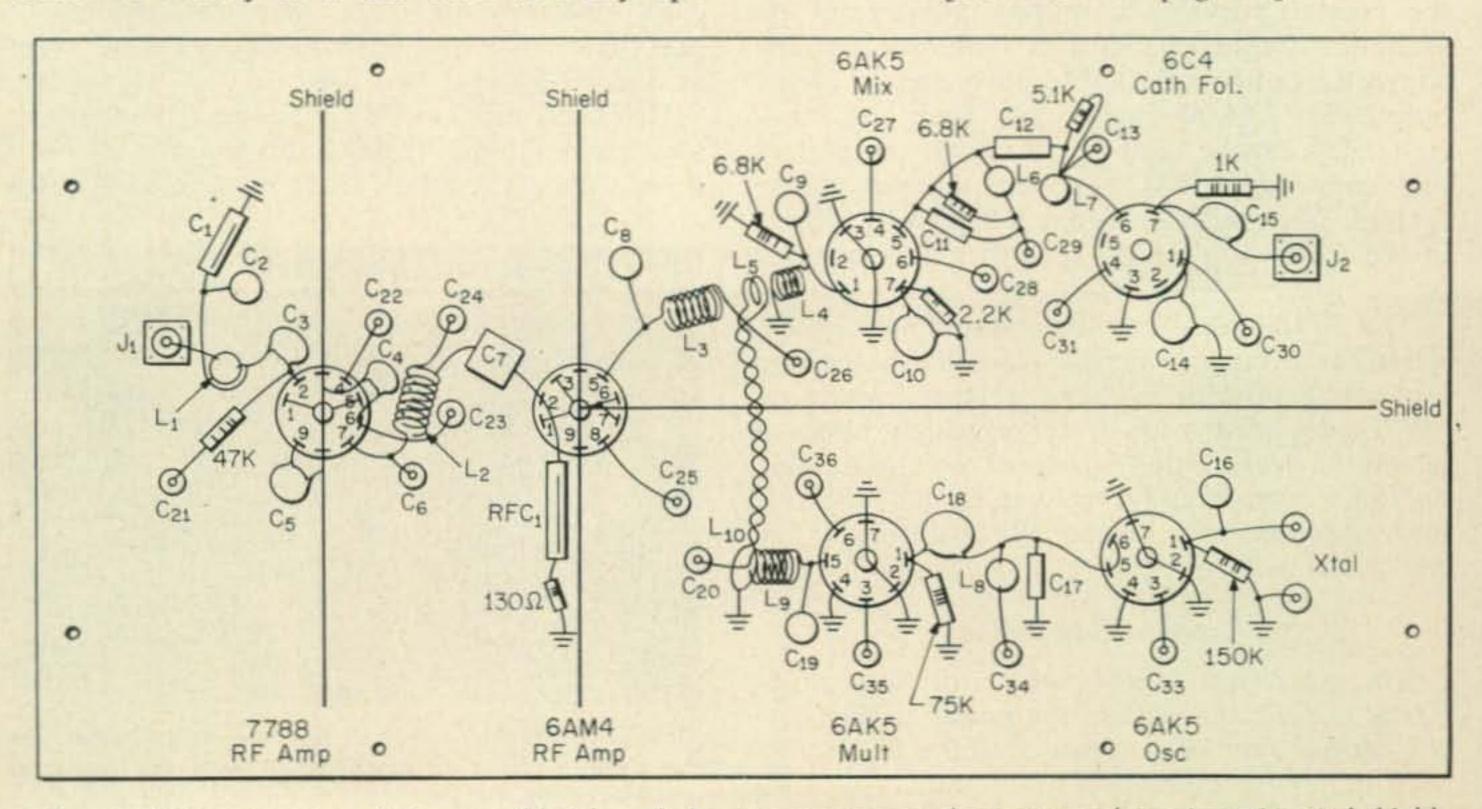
Bottom drawing of the assembled board showing component placement, socket orientation and shield positions for the critical areas.
